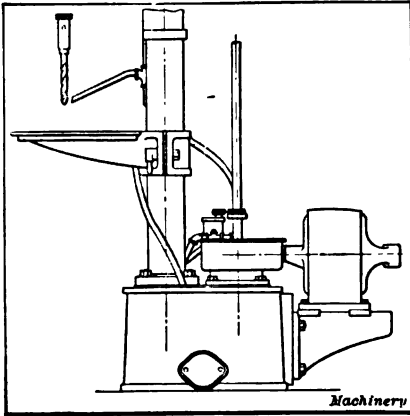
Base of Drilling Machine used for Lubricant Tank
